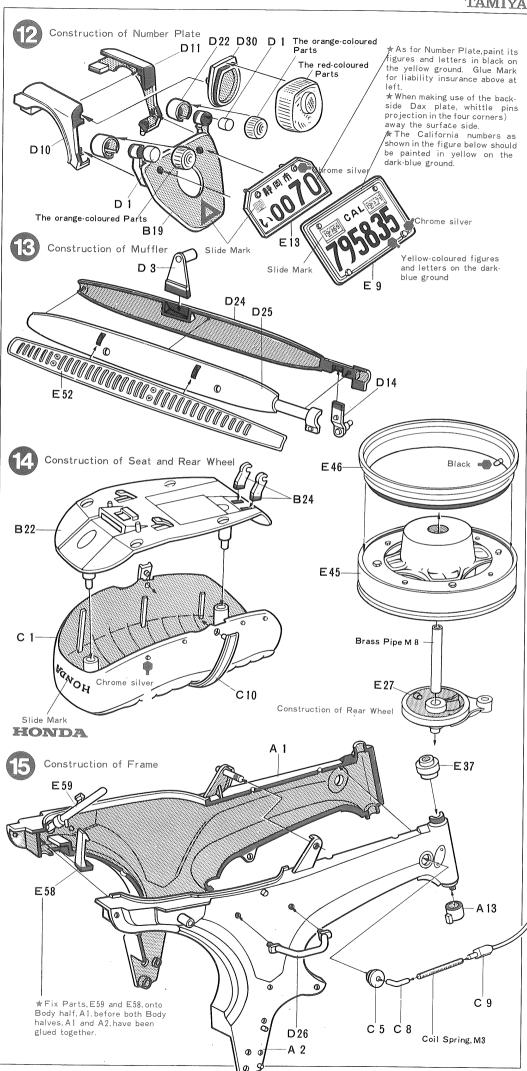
Construction of Frame Pass part E59 through frameside A1 and cement parts E58 to A1. Then cement right and left parts of frame, locating end of E59 into recess hole on A2. Cement D26 into locating holes on A2. Cement E37 and A13 on to completed frame as shown. Cement C9 to the length of vinyl tube to C8 and C5 and cement C5 to recess hole on front of A2.
